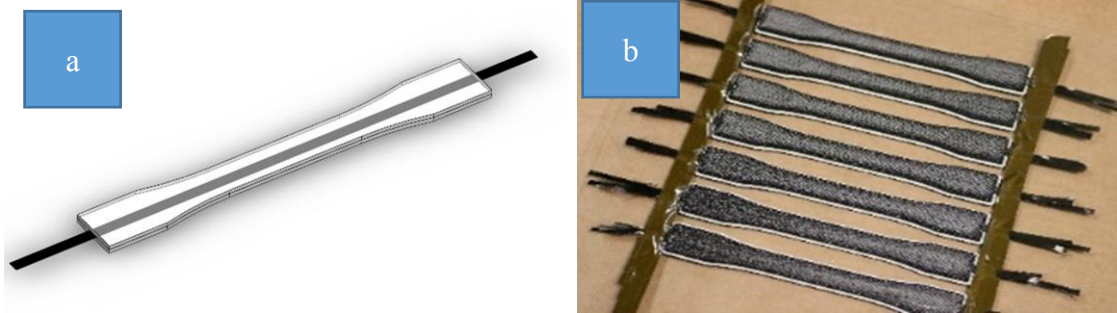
1 Process involved in fabrication of 3D printed polycarbonate parts with embedded continuous carbon fiber, (a) cartoon and, (b) final parts of D638 Type I tensile specimens
